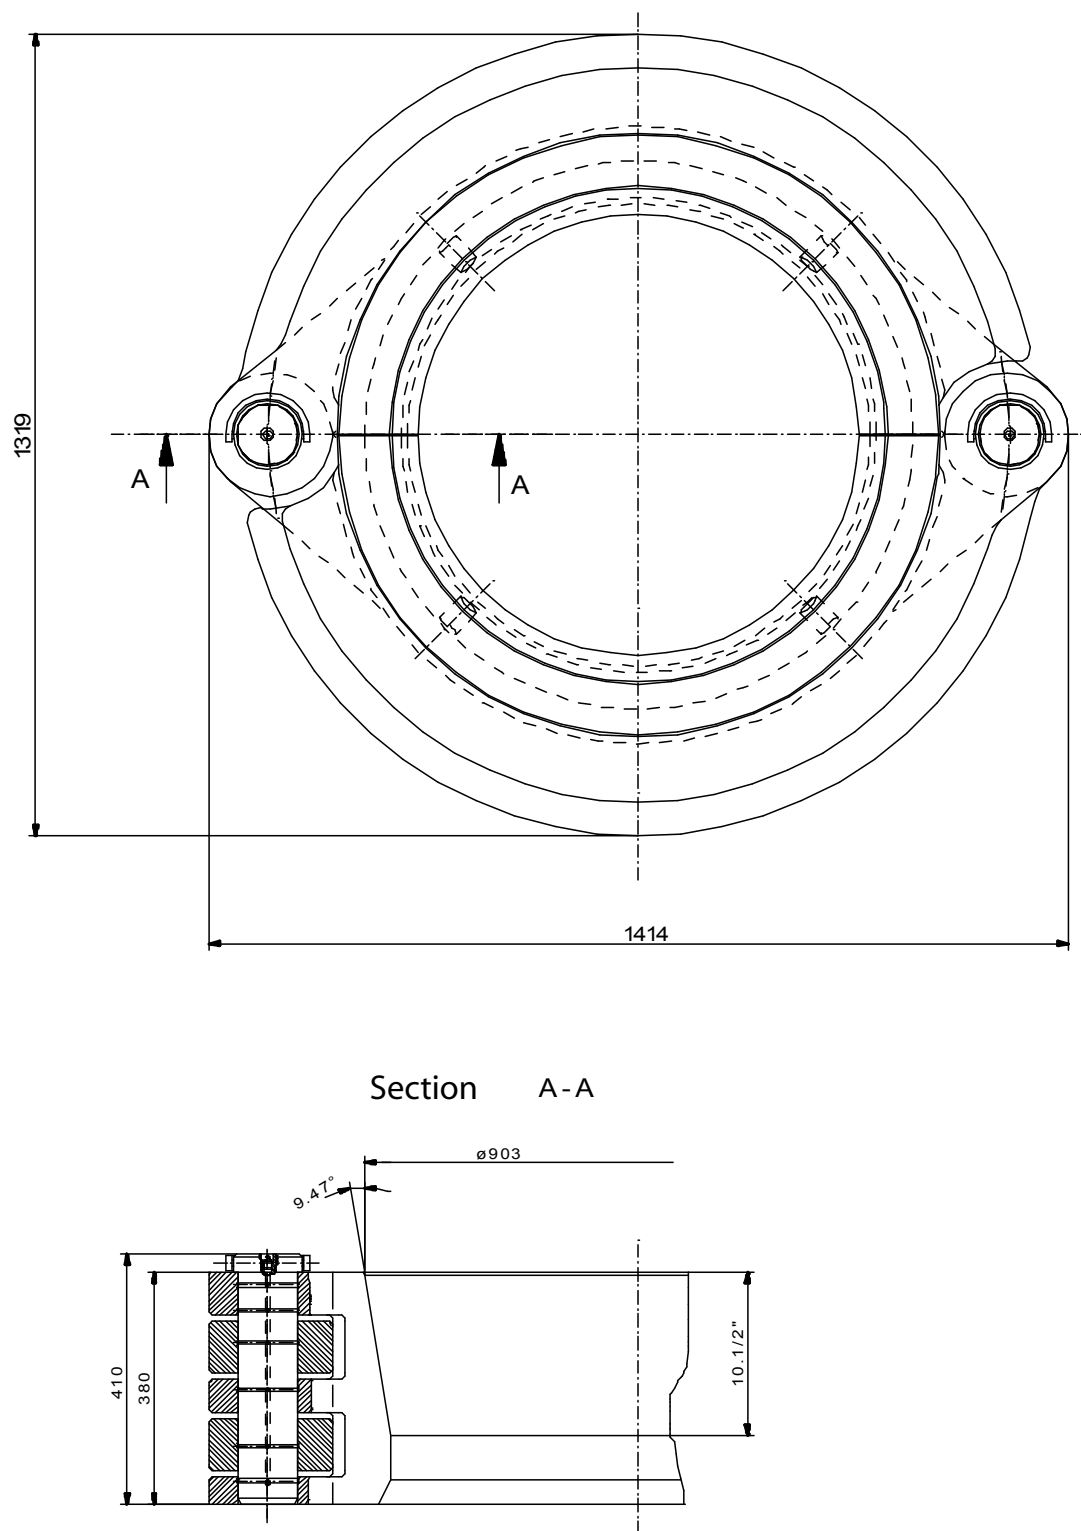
Principle drawing of a HCS 500-30" main dimensions
